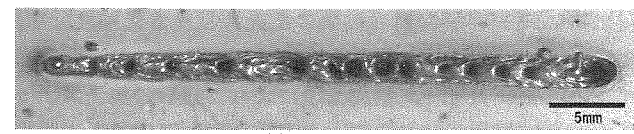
A Result of zero gap lap welding of 1 mm thickness galvanized steel sheet at output power 3 kW and welding speed 1.5 m/min with a conventional single spot.
